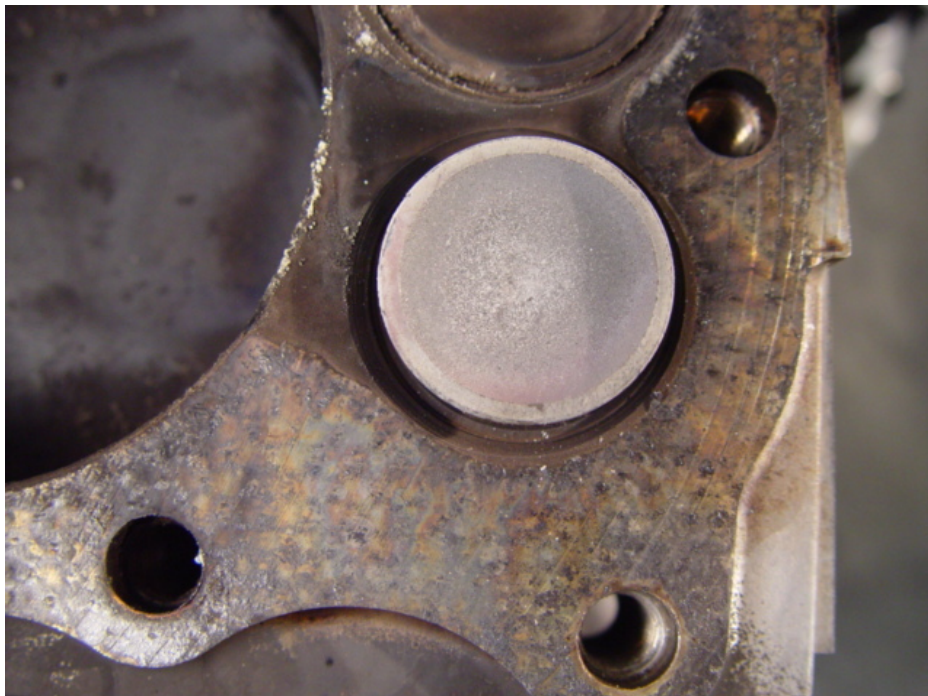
Hot exhaust valve with blow-by caused by high combustion temperatures.
